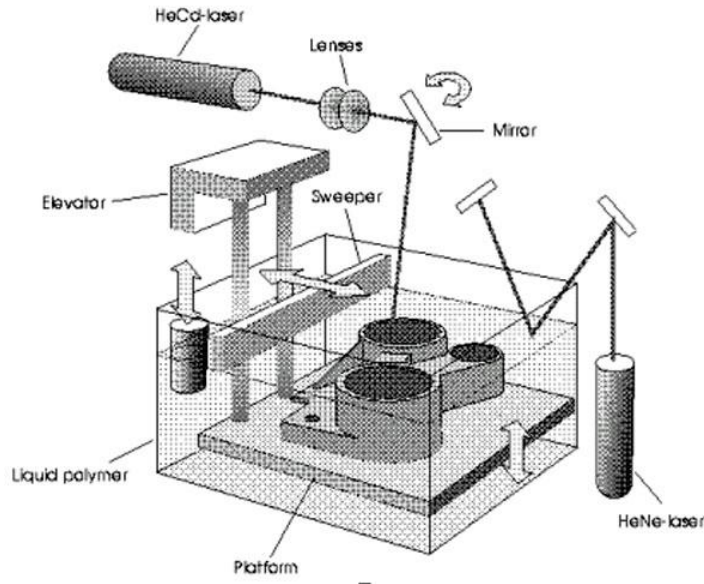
An SLA machine and its components. SLA machines are one of the first machines capable of 3D printing and have been produced since 1988.
